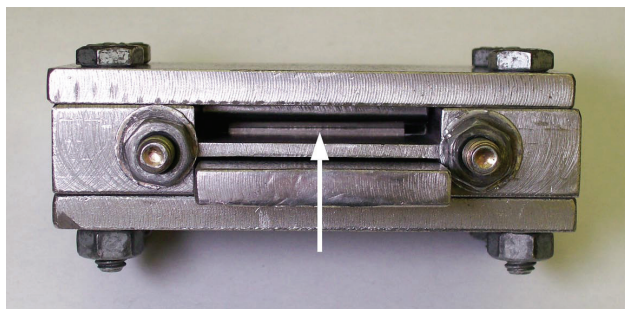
Alumel bending clamp assembly top view (both dies in place). The arrow shows the unbent piece of alumel.
